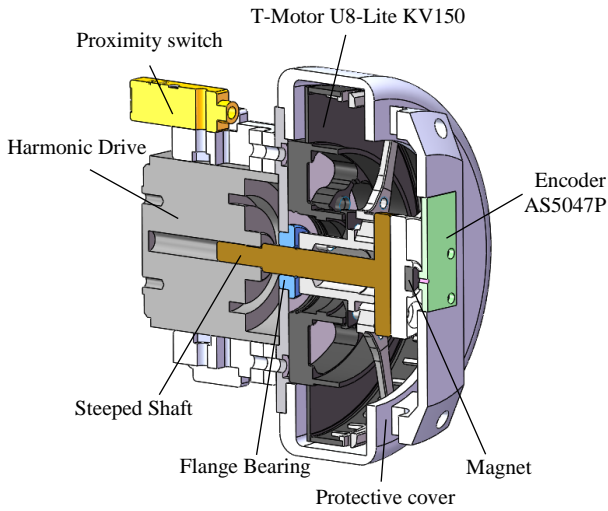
The modular joint design used in Jet-HR2. Motor, Harmonic Drive and multi-sensors are integrated.
